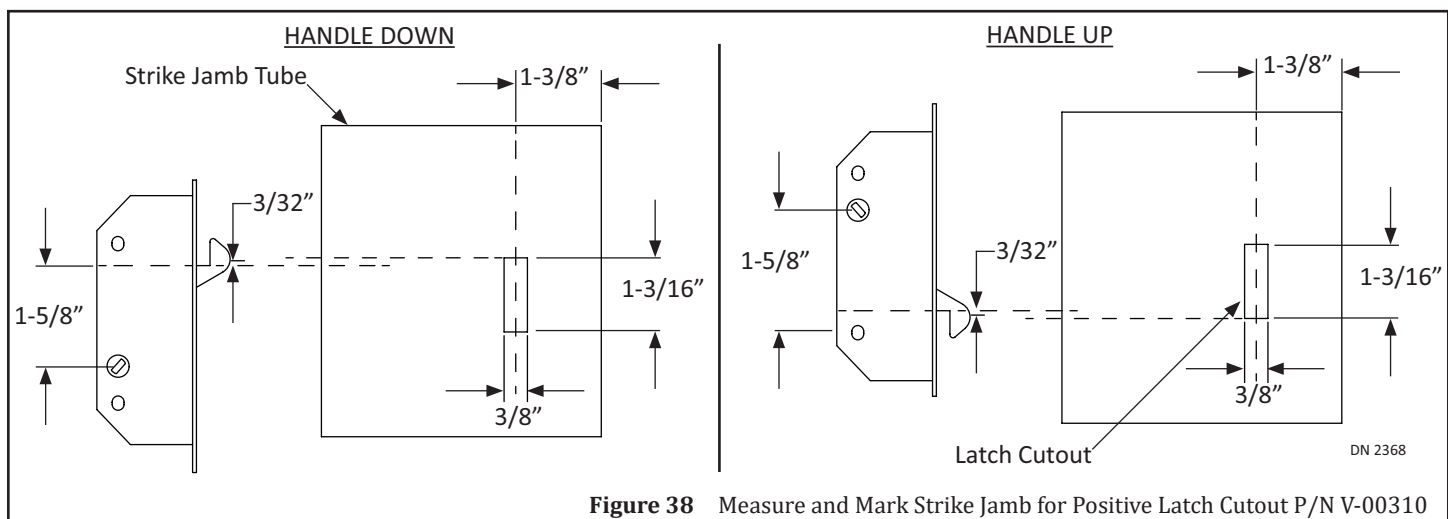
Measure and Mark Strike Jamb for Positive Latch Cutout P/N V-00310
